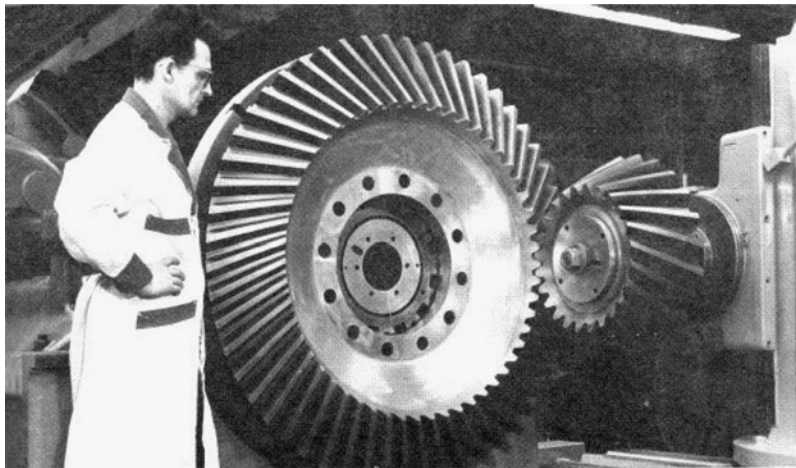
A 54 gear carburized and finished without grinding passes contact test with its pinion. (Courtesy of Brad Foote Gear Works, Inc., Chicago, Illinois.)
